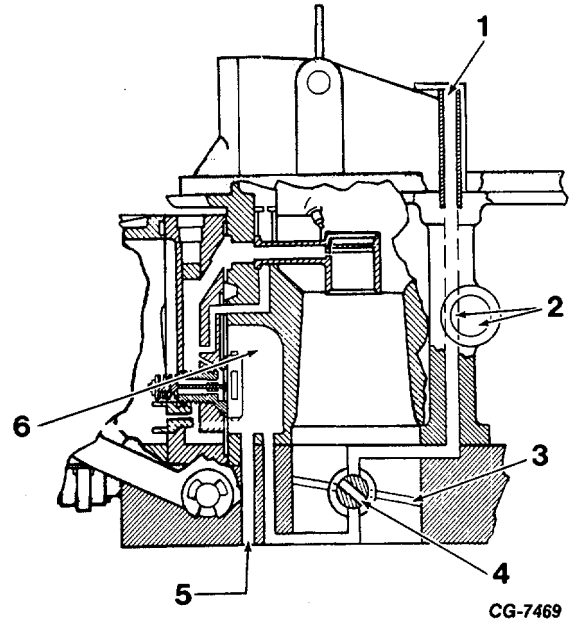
Modulator Valve in Closed Position Power Valve Closed
